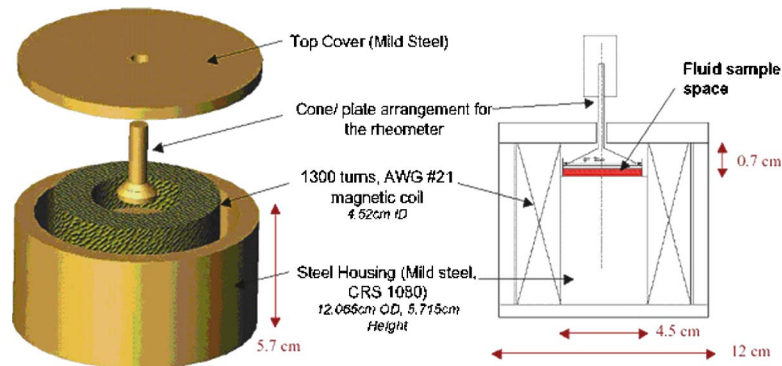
Custom designed MR fixture for AR2000 rheometer
